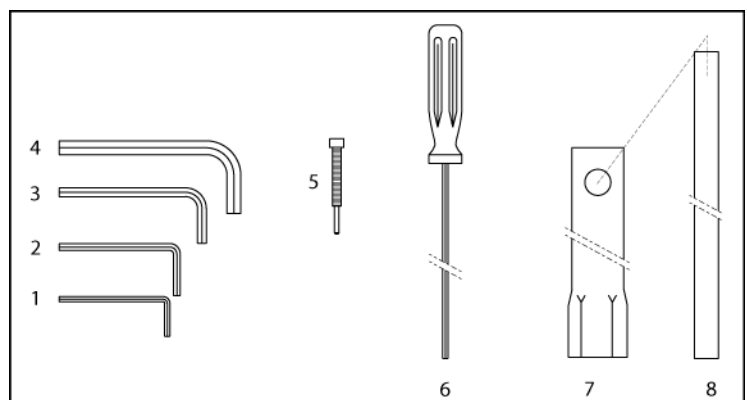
Tool set for 854 XTG (part no. 1894.062)
